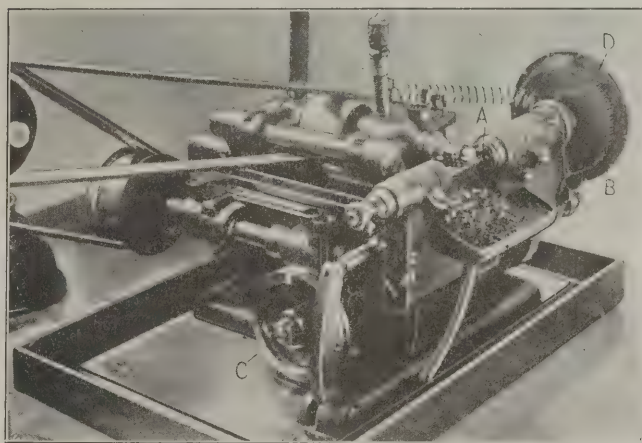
Automatic Three-cutter Pinion-cutting Machine
